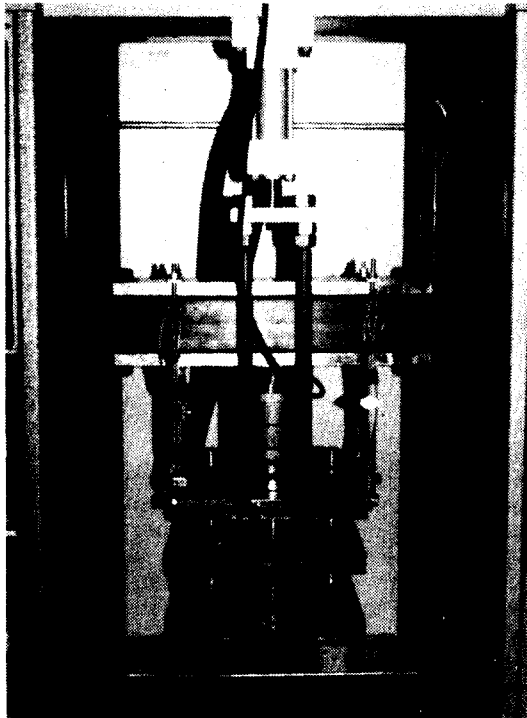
The photograph of the subpress assembly installed in an Instron testing machine. The punch plate is driven by the cross head of Instron testing machine, and the blankholder plate by a hydraulic cylinder
